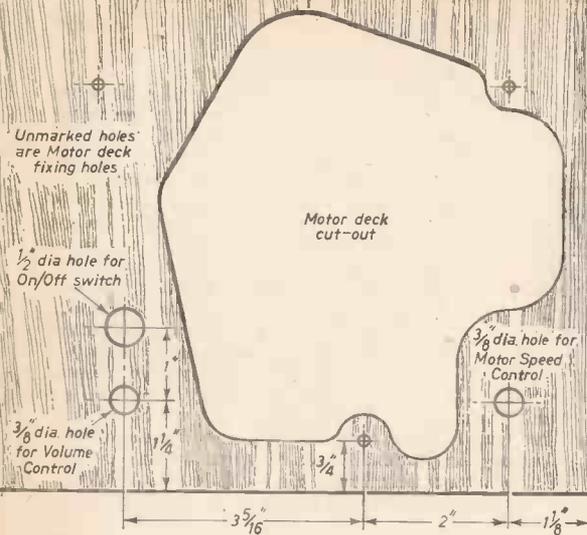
The cutaway portion and drilling positions of the motor board.
